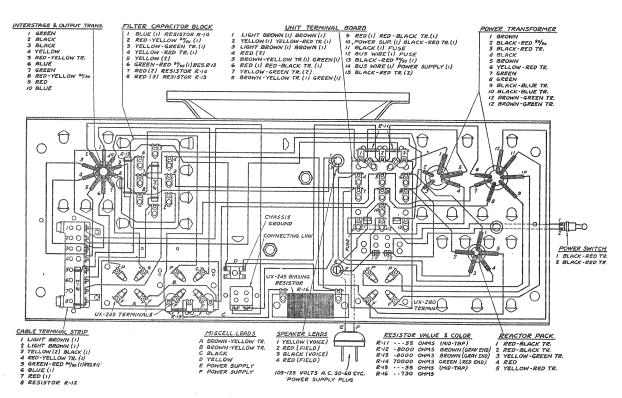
Bottom View of Radio Chassis, Showing Wiring Between Terminals.
